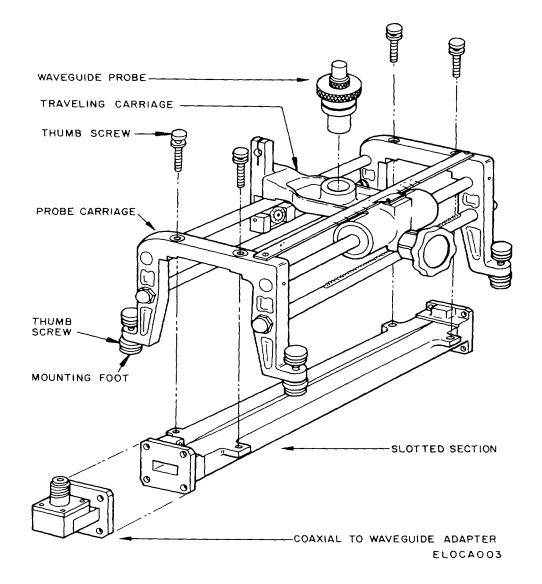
Probe Carriage MX-1545/USM-37 and Slotted Section, Assembly Diagram
